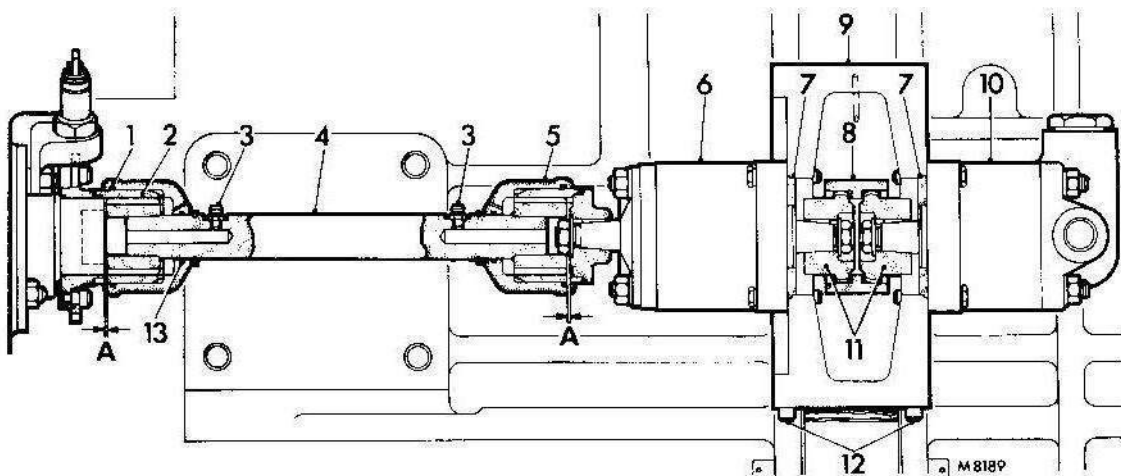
GENERAL VIEW OF HYDRAULIC PUMPS
